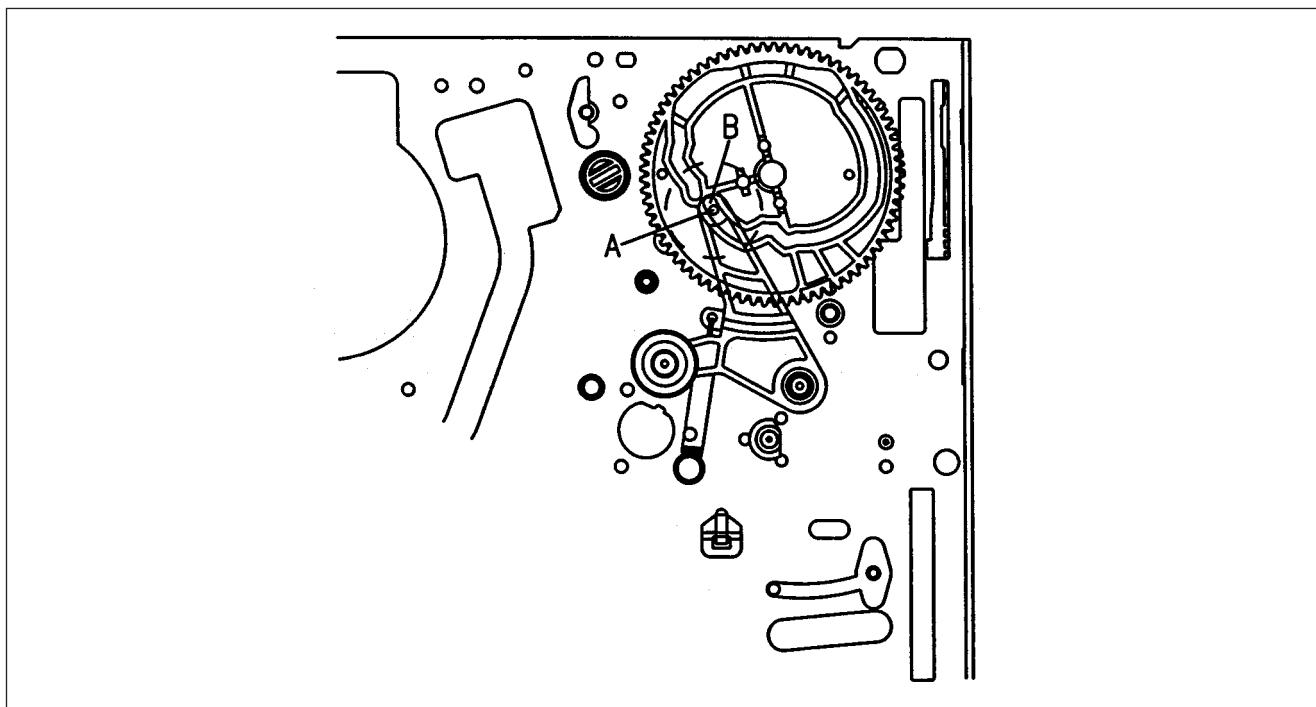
Mechanical Checks/Pinch Lever and Cam Gear Alignment
